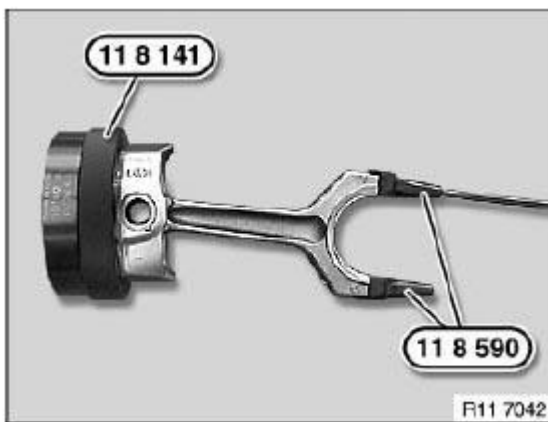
Identifying Special Tools (11 8 141, 11 8 590)
